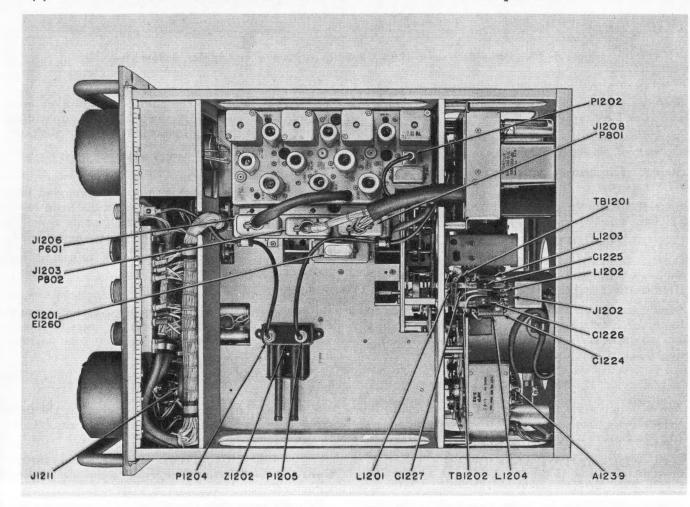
Radio Receiver R-278B/GR, Bottom View
